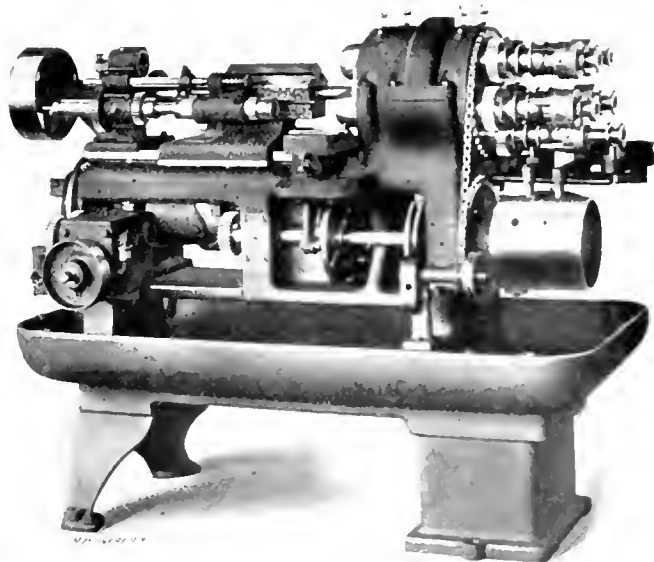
Rear View, showing the Cam-shaft Drive, and the Operating Mechanism.
